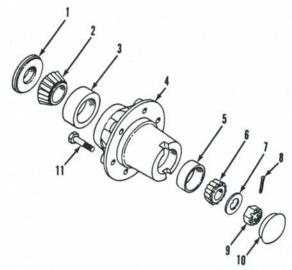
Exploded view of front wheel hub and bearings used on two-wheel drive models equipped with nonadjustable (cast) front axle. Refer to Fig. 1 for legend.
